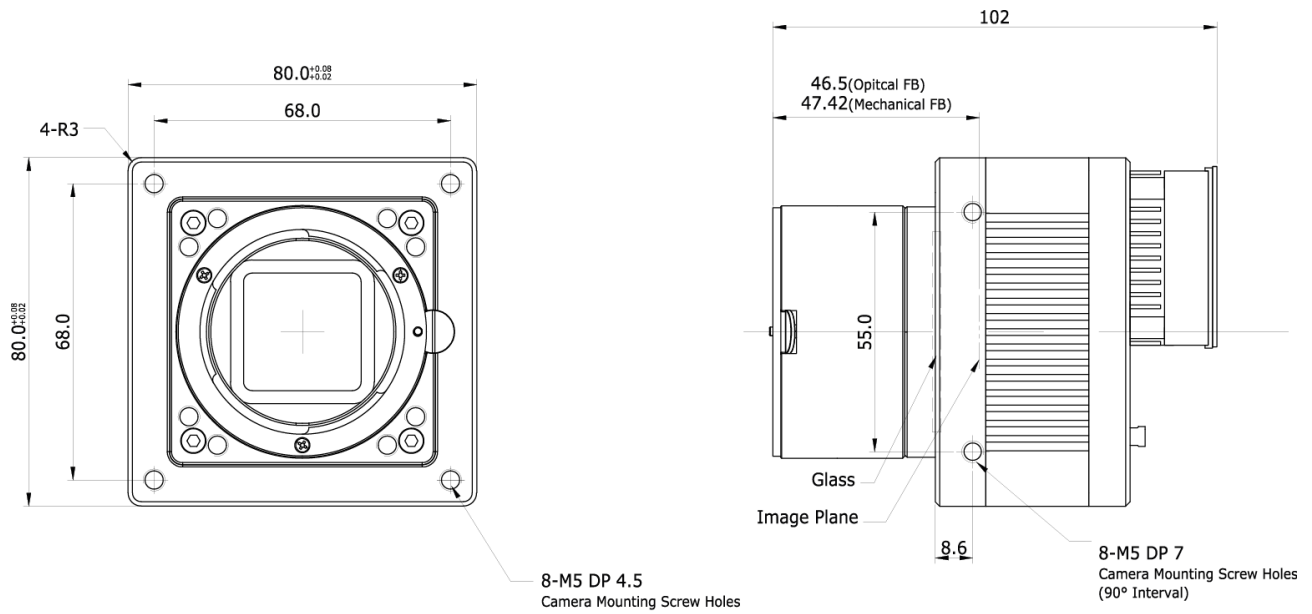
VC-12MX2-330 F F-mount Mechanical Dimension
